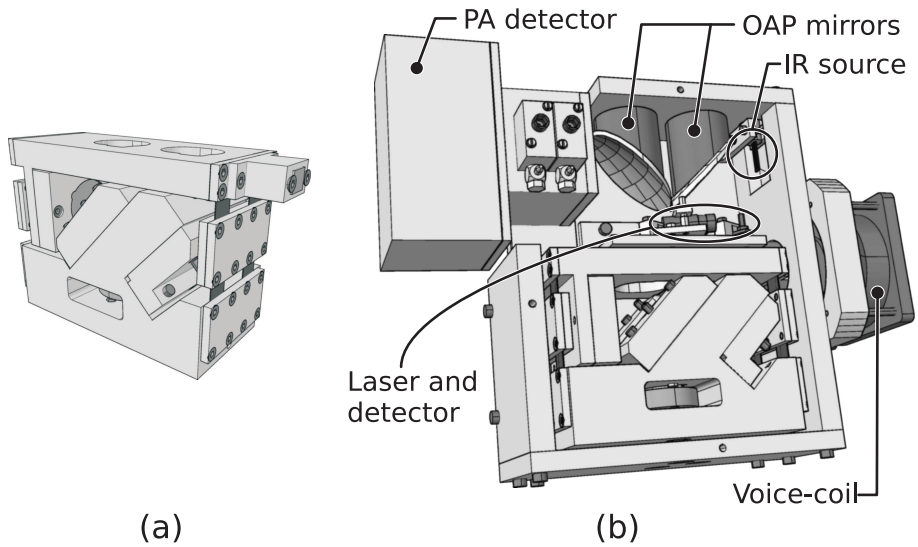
Schematic drawings of the 3D model of Swing I. The left drawing illustrates the interferometer and the right one the spectrometer with photoacoustic (PA) detector. OAP mirrors are similar off-axis parabolic mirrors.
